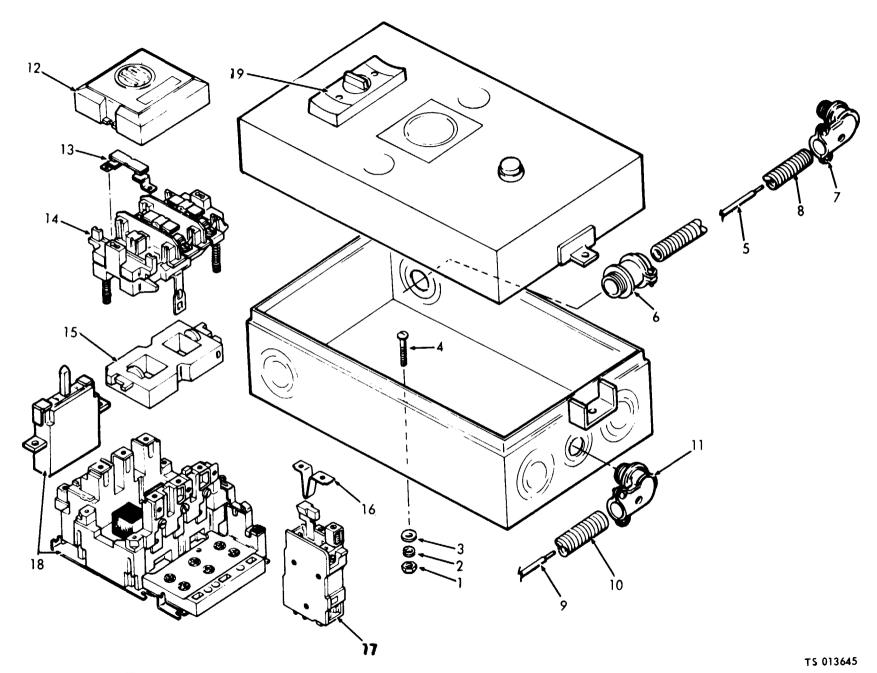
Magnetic starter assembly, exploded view (Model HR5-8M-3).
